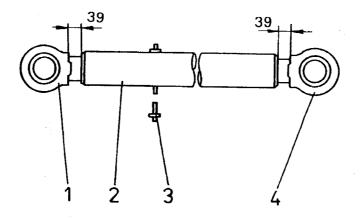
Upper Strut Adjustment of Angle Blade.
